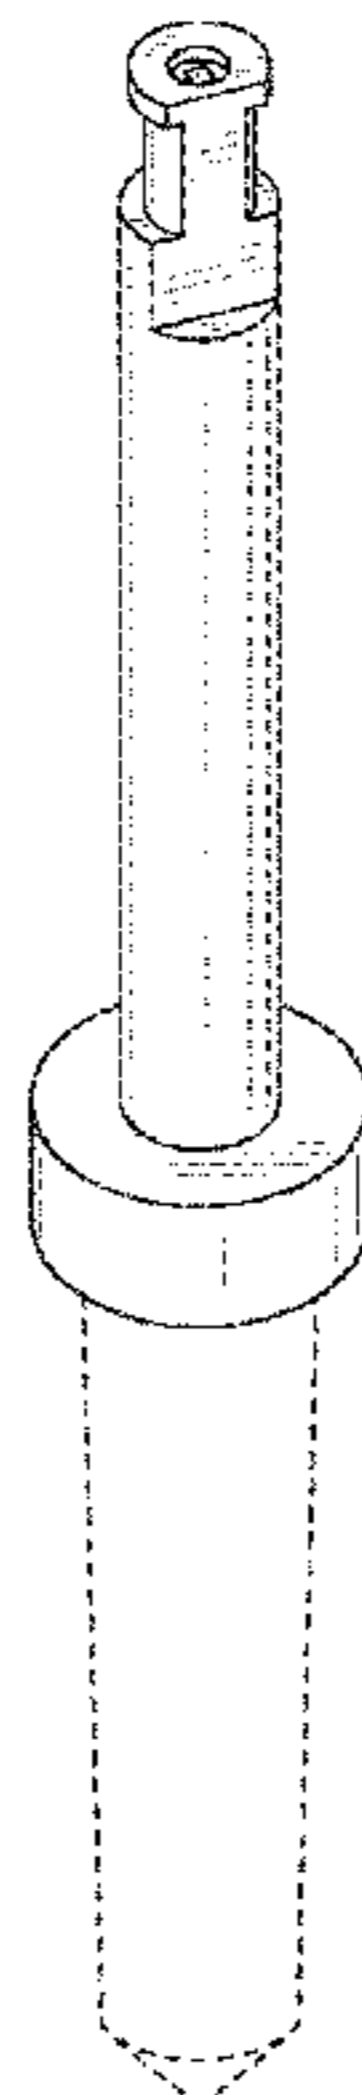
is a back view of the dental tool with a transponder shown in FIG. 1;
